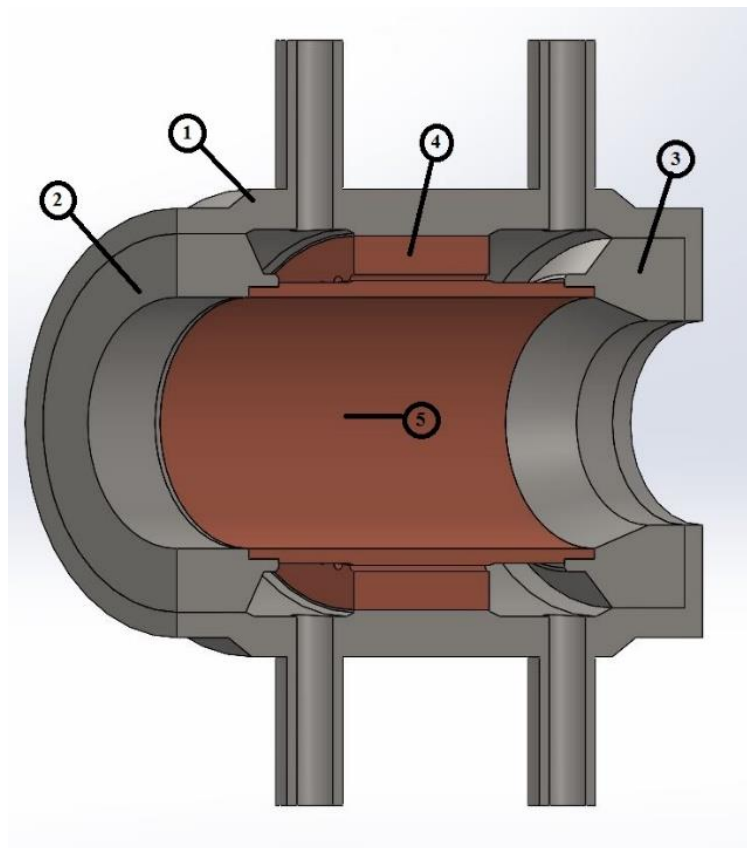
Section of mock-up used in thermal model, grey color refers to stainless steel and red to copper. 1 – Mantel, in Austenitic Stainless Steel, 2- Front insert, in Austenitic Stainless Steel, 3 – Back Insert, in Austenitic Stainless Steel, 4 – Water stopper
